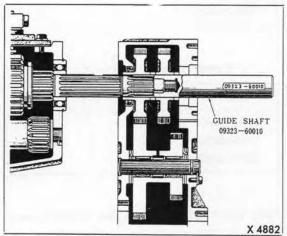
Installing the transfer case to the transmision case with special tool.
